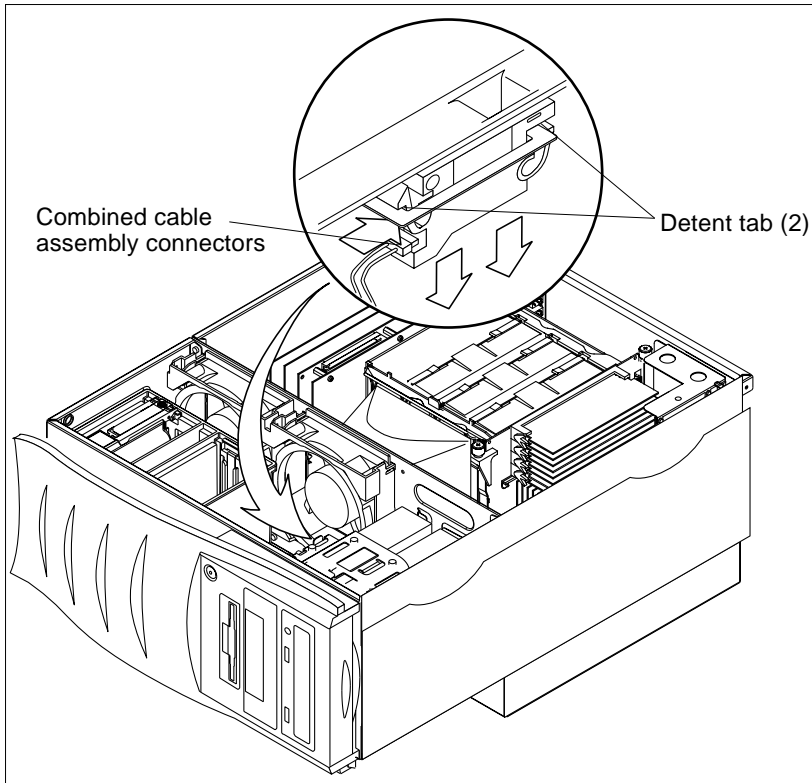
Removing and Replacing the Interlock Switch Assembly
